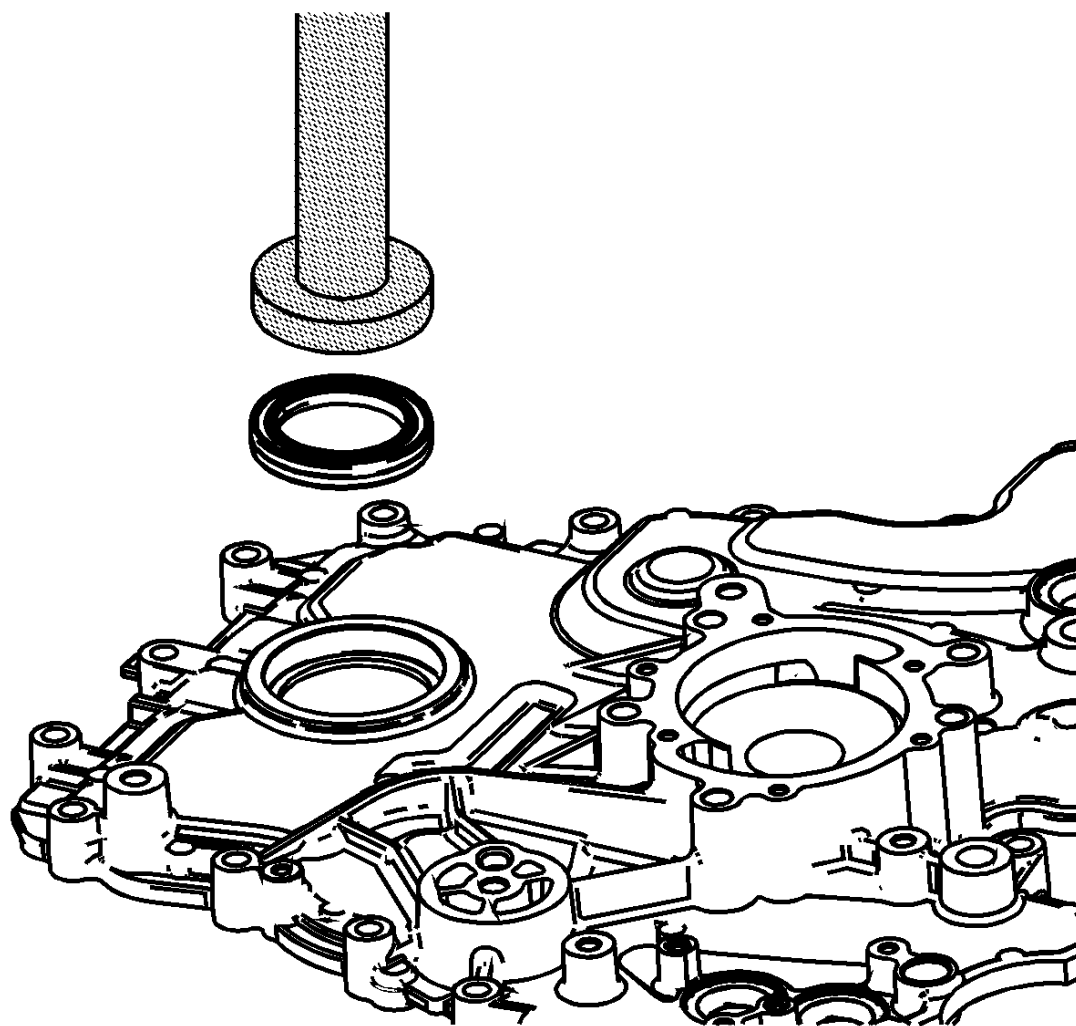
View of Crankshaft Front Oil Seal Assembly
